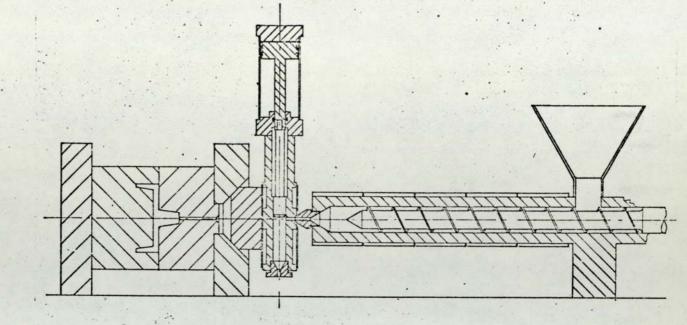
Capillary Viscometer with Injection Moulding Machine showing method of clamping.
